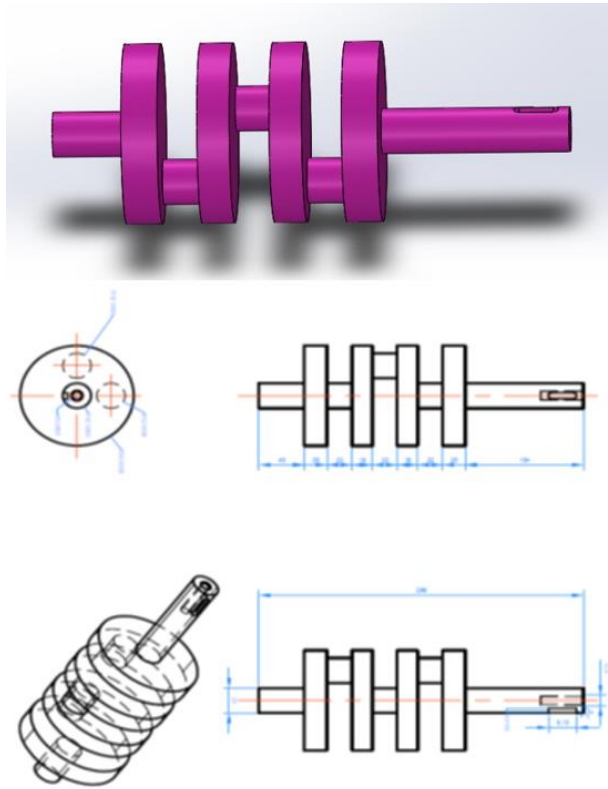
General views of the crankshaft designed in the SolidWorks environment
